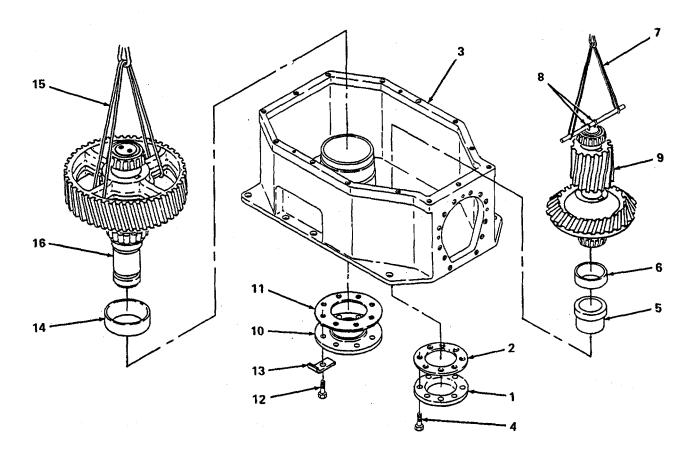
Installation of Intermediate and Low Speed Shaft Assemblies.
